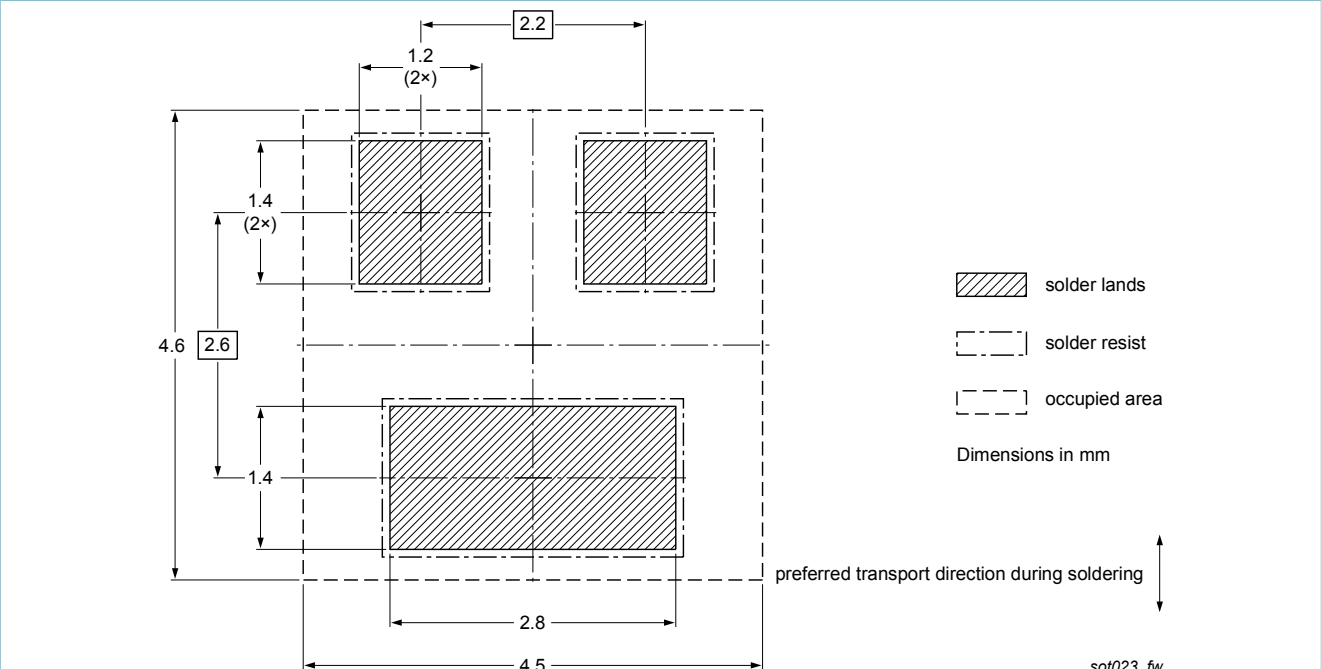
Wave soldering footprint for TO-236AB (SOT23)
